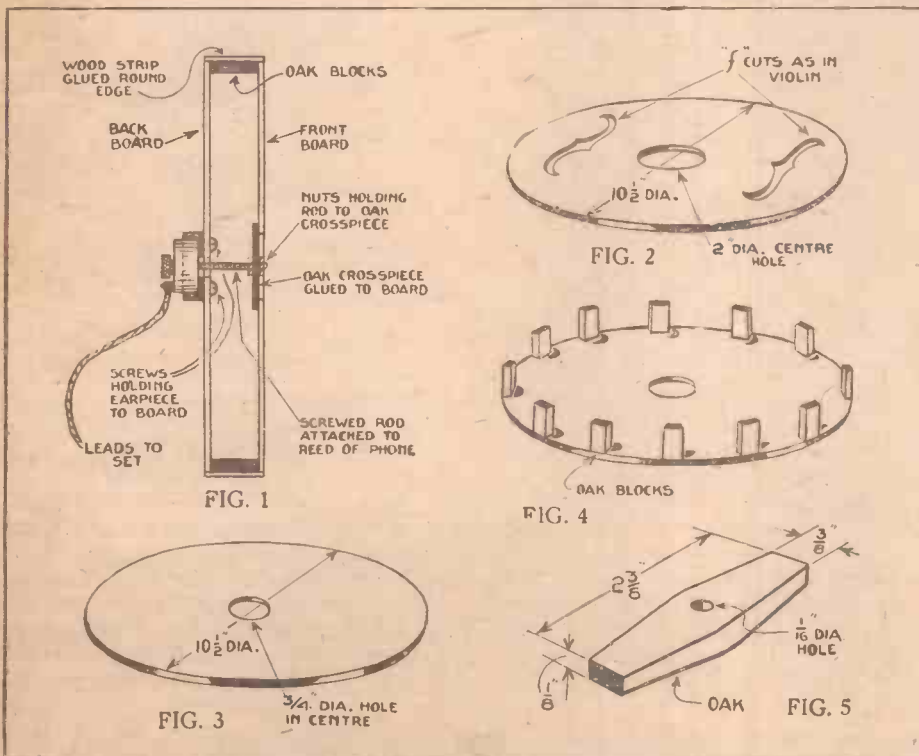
Section of Loud-speaker. Fig. 2.—Front Board. Fig. 3.—Back Board. Fig. 4.—Arrangement of Side Blocks. Fig. 5.—Oak Cross Piece.
